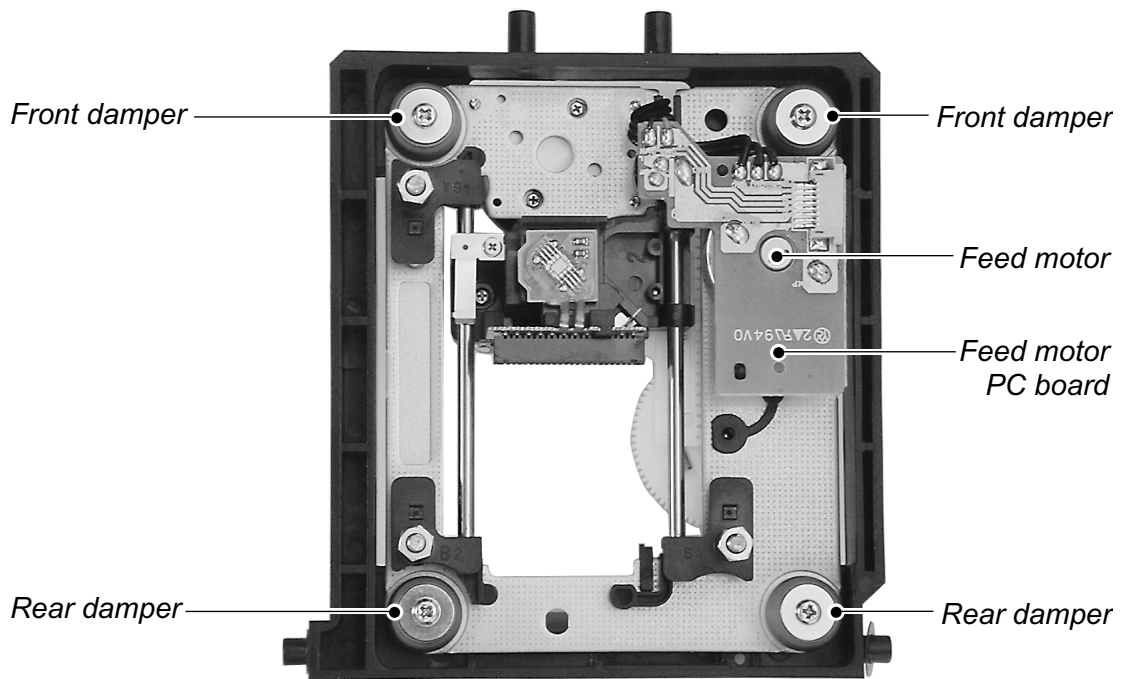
Mechanism chassis assembly (Bottom side)
